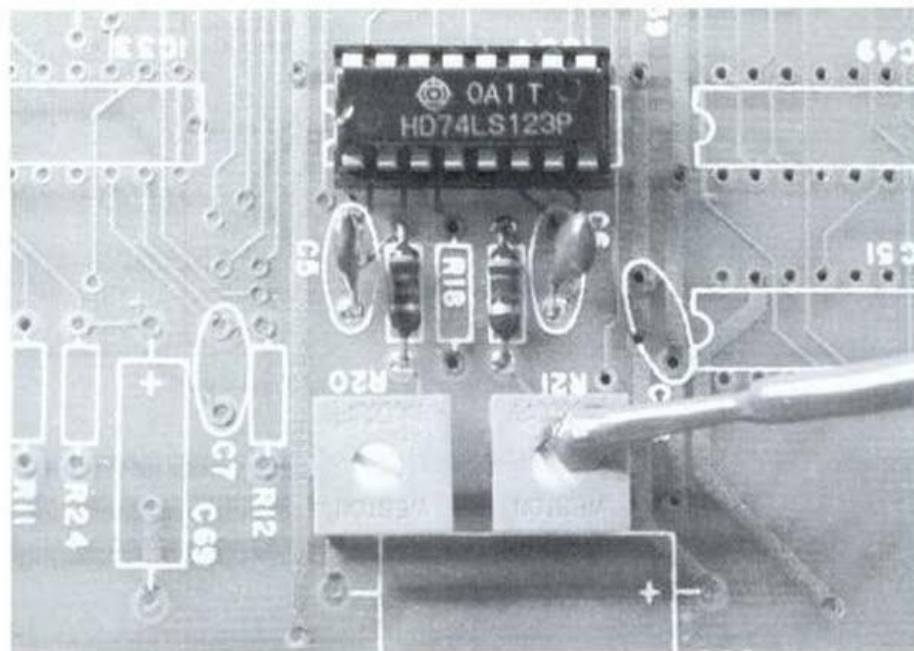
External-data-separator section of the Disk-80 board. An external data separator is recommended when using the FD1771 disk controller with the 5-inch floppy disks. This circuit (shown in figure 5) can also be added to the Radio Shack TRS-80 Expansion Interface to improve performance. After setting the adjustment potentiometers, use nail polish as shown to lock their positions.
